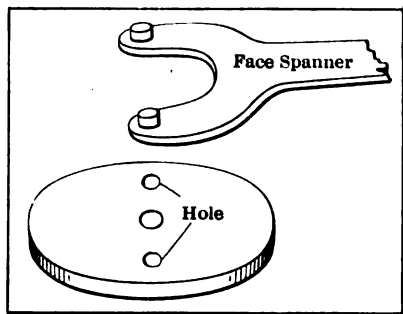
Face spanner and face nut, showing holes in nut and projections on spanner
